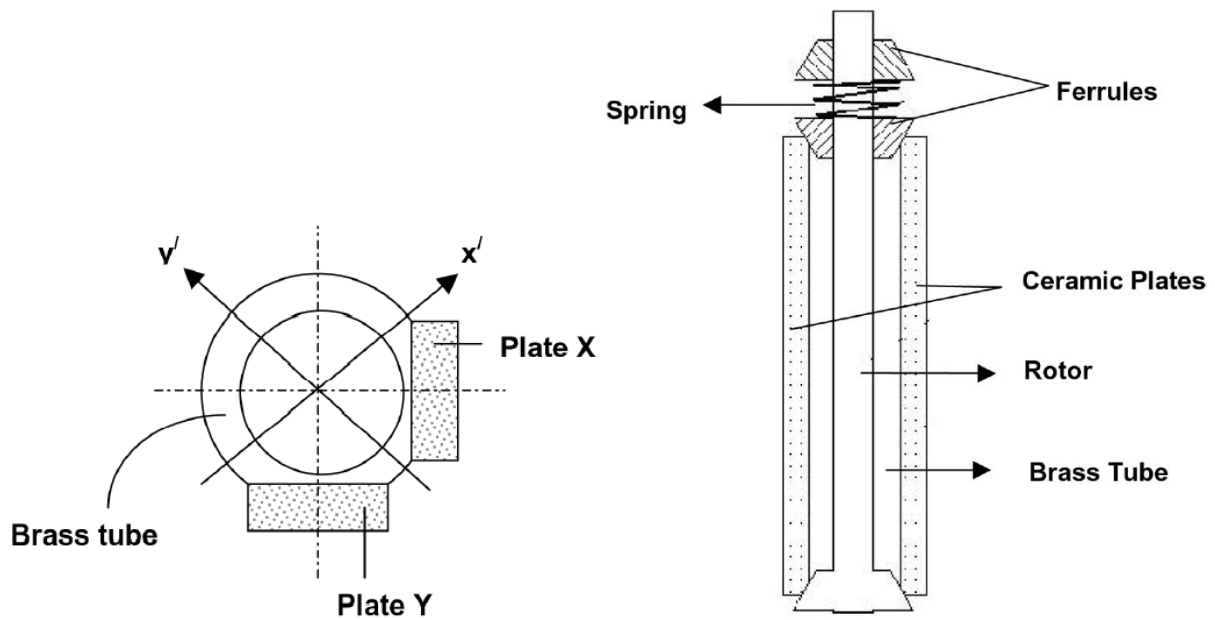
Metal tube with two PZT pieces bonded with rotor placed on the ends of the tube [39].
